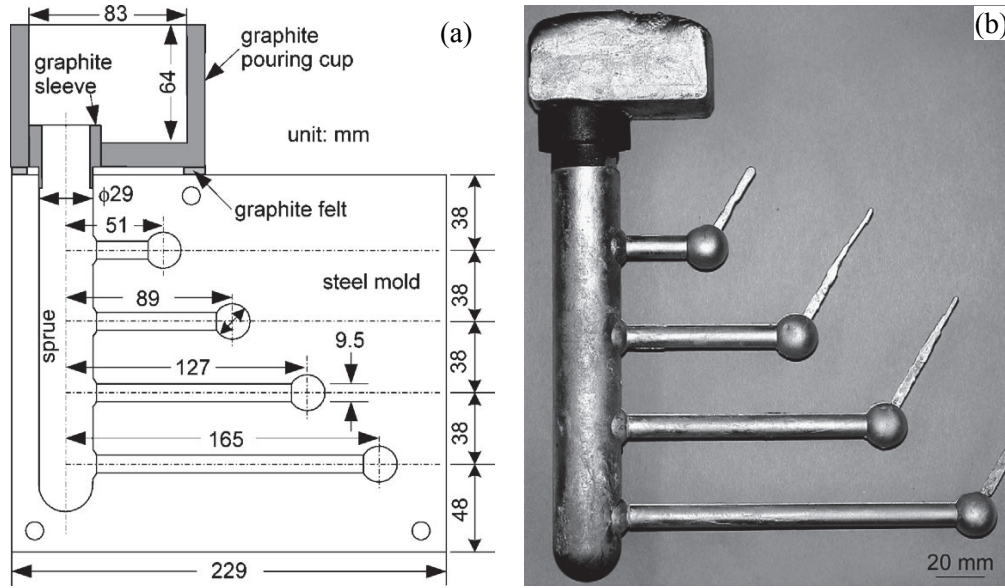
Another constrained mould casting, (a) schematic mould, (b) casting [17]
